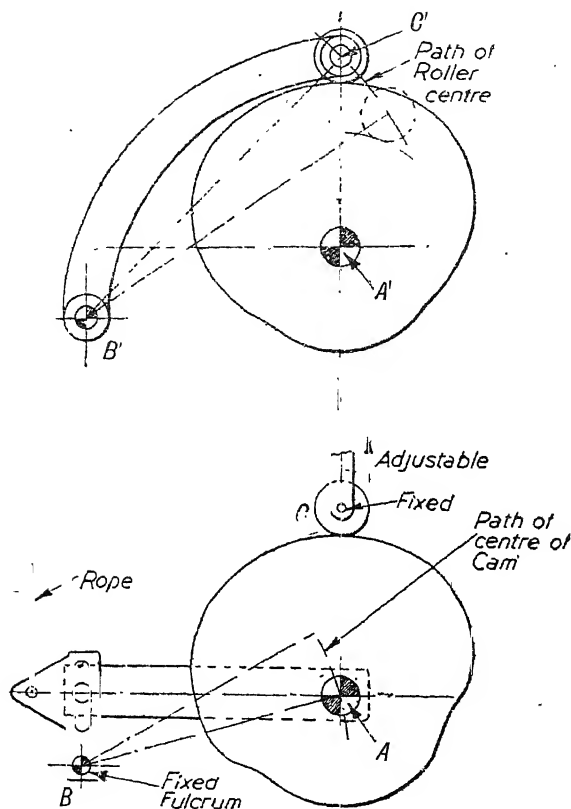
Principle of the mechanism: above, cam-milling mechanism; below, actual cam mechanism.
